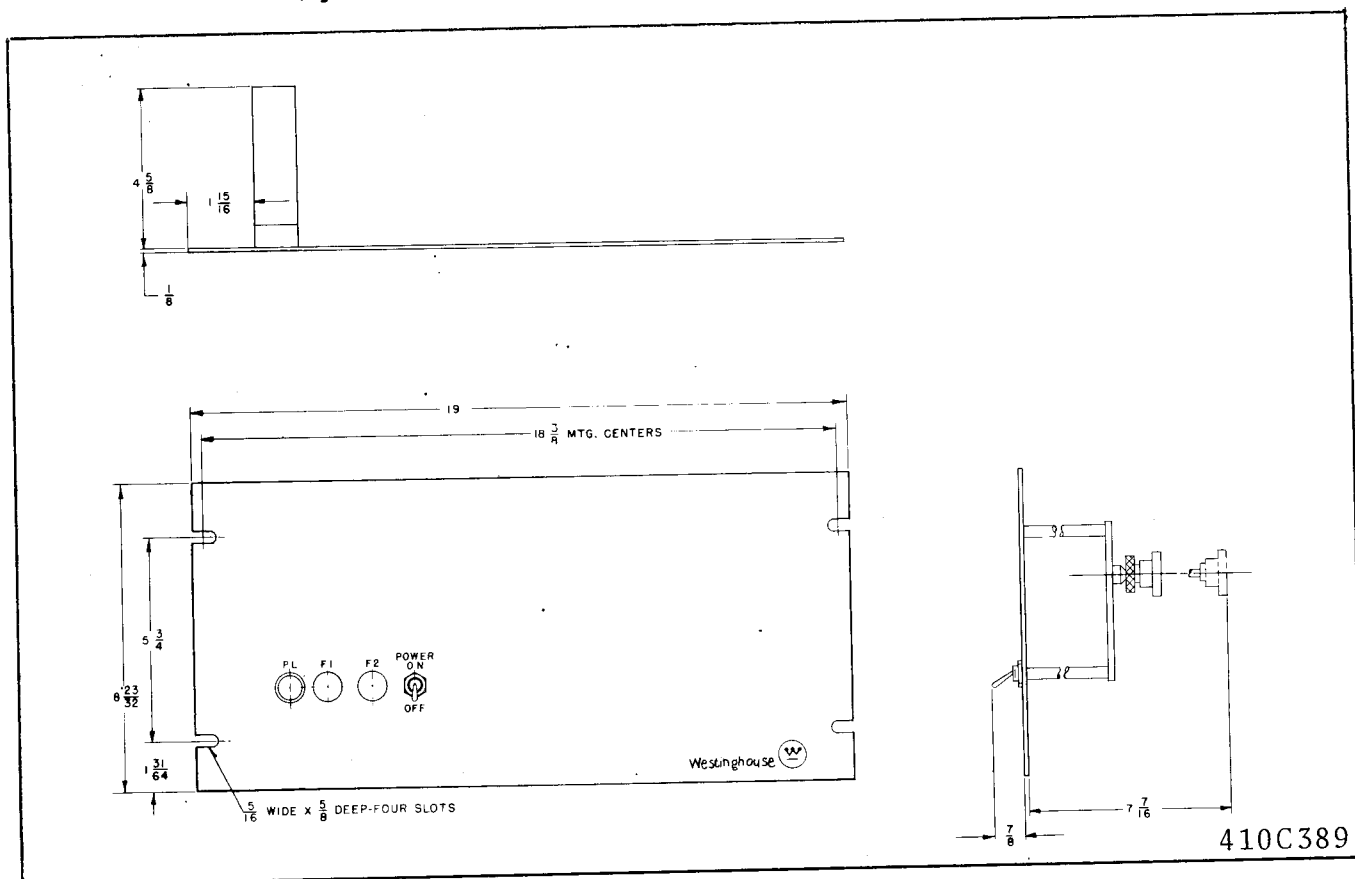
Outline and Drilling Plan for the Type TCF Transmitter Assembly.
